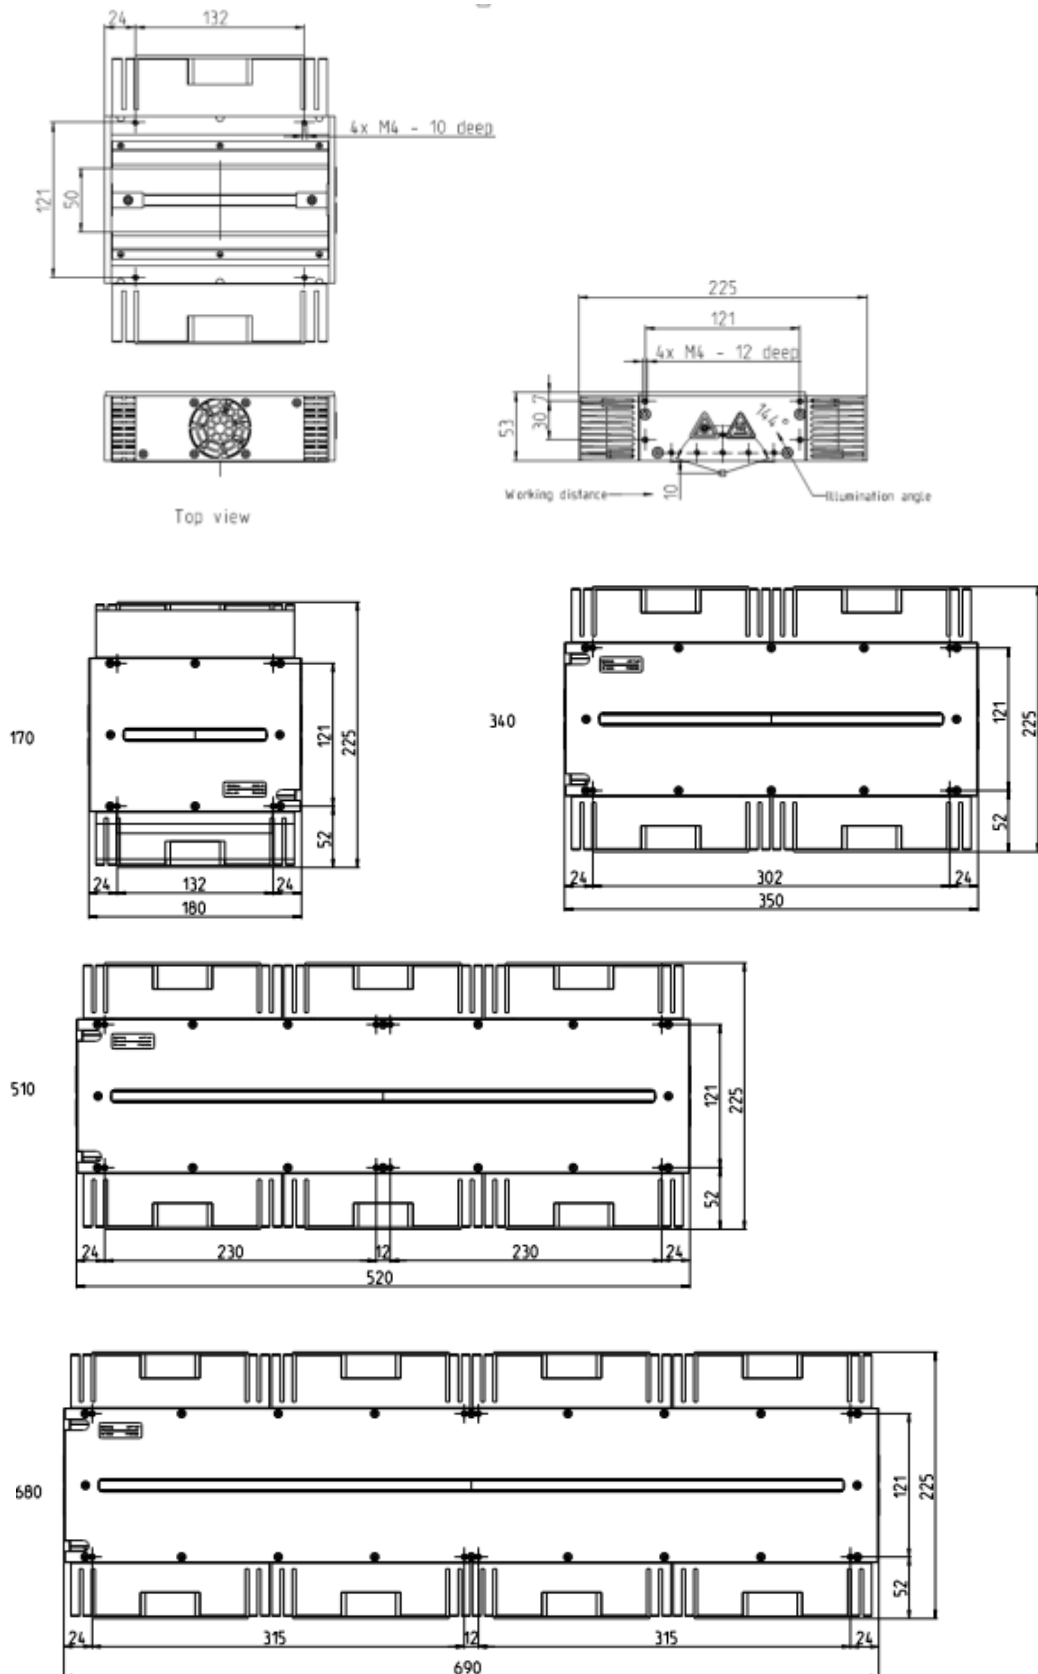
Mechanical fixation for tube light type version up to 680mm (type T and U)
